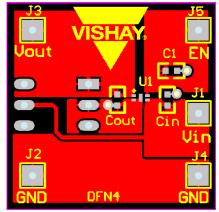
Top, PCB Layout for TDFN4 1.2 mm x 1.6 mm (board size: 1 inch x 1 inch)
